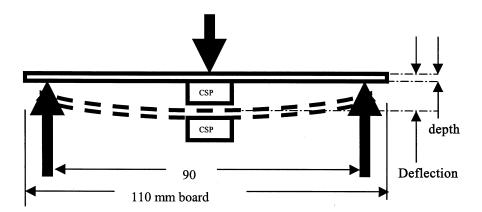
PCB Bend Test for the 24L CSP as Mounted to 1.6mm thick FR-4 Board
